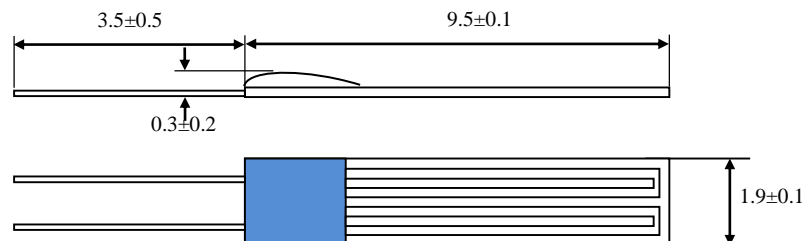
Dimensions of single Pt6.8 microheaters. All dimensions in millimetres.
